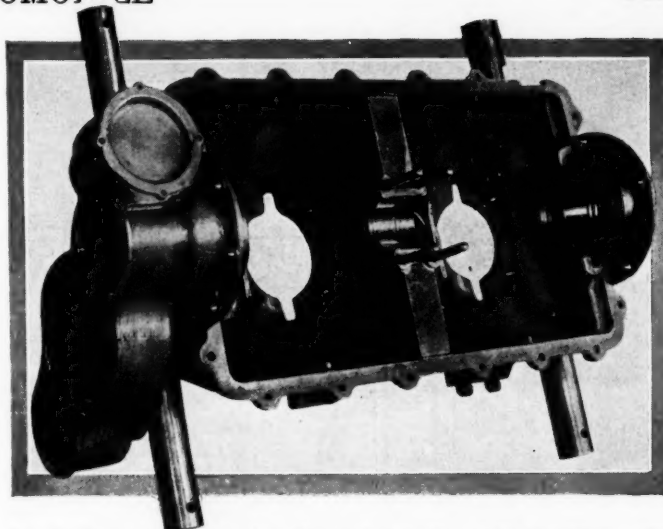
Crankcase of racing Maxwell showing main bearings. The end ones are ball and the center plain
